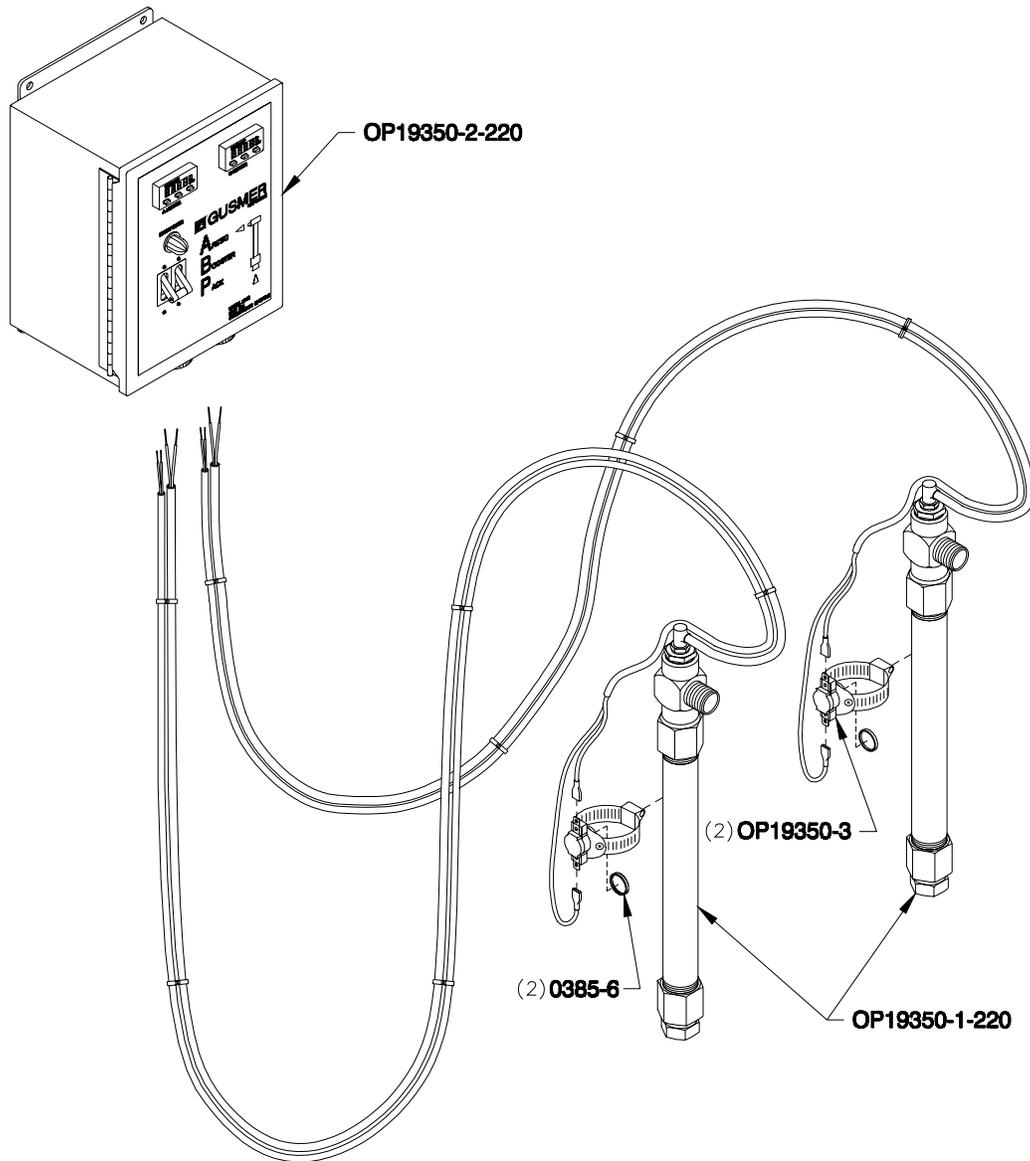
Inlet Heater System, (Part No. OP19350-220), Exploded View
